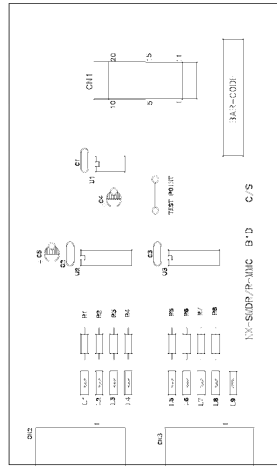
NX-SMDR/R-MMC BOARD
